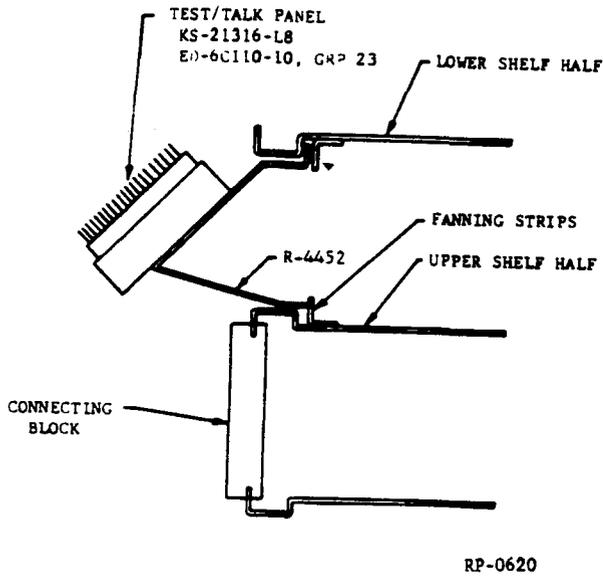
TEMPORARY MOUNTING OF TEST TALK PANEL FOR WIRING
